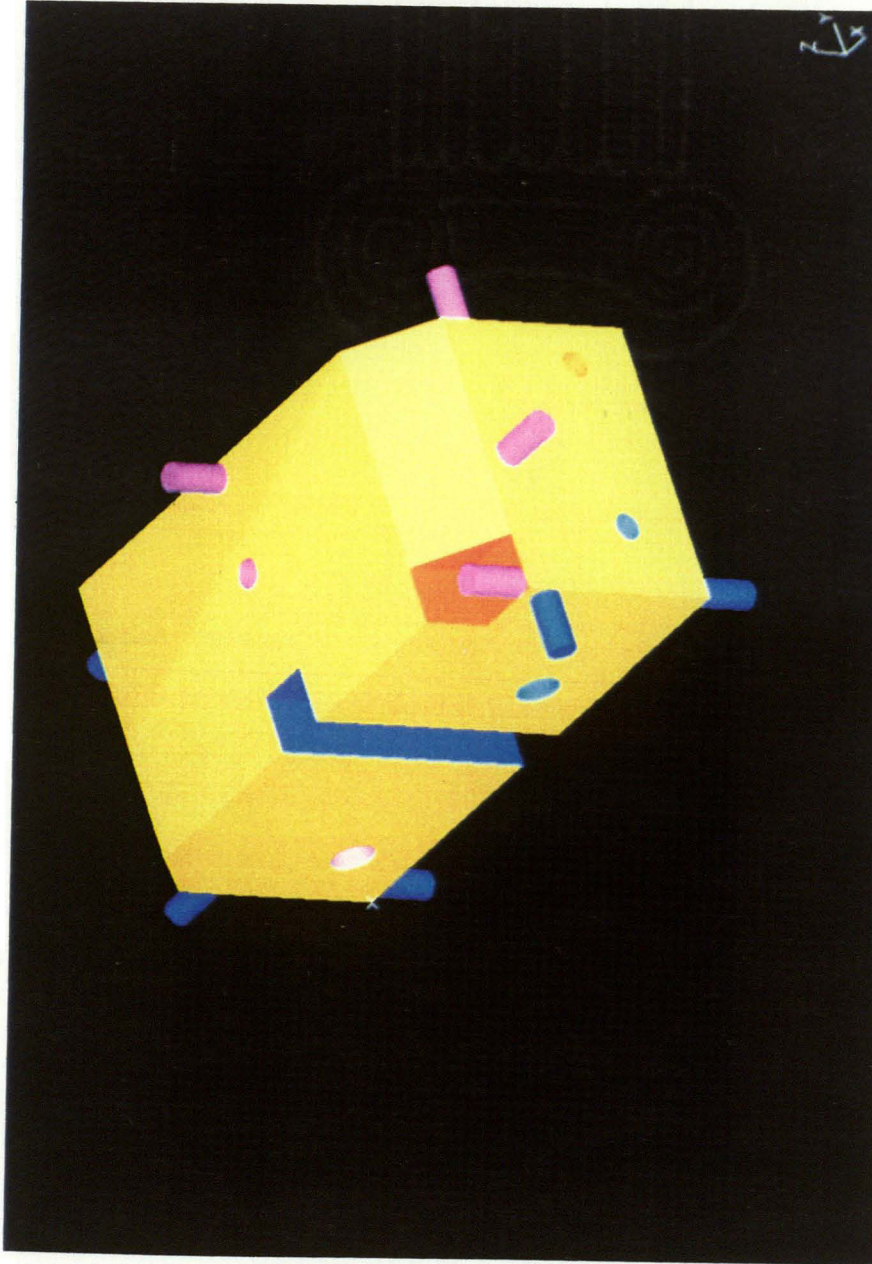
An isometric view of the workpiece with locators in blue and clamps in magenta
